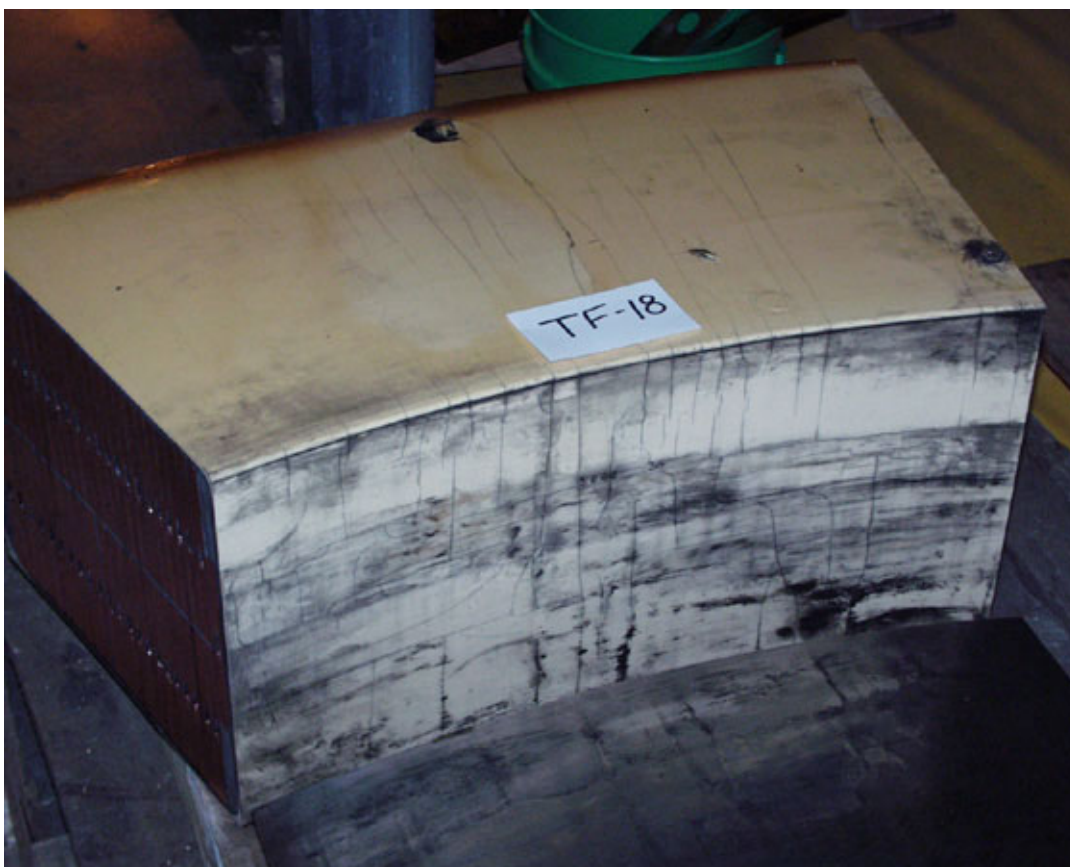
Minor cracking in TF #18 back leg section potting compound
